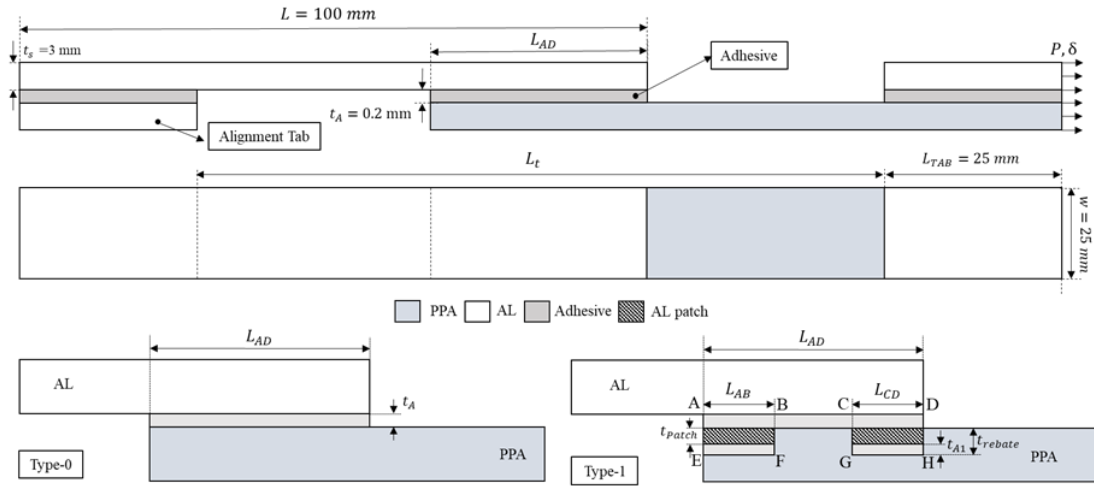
Dimensions and geometry of (a) unmodified (b) modified dissimilar SLJs
